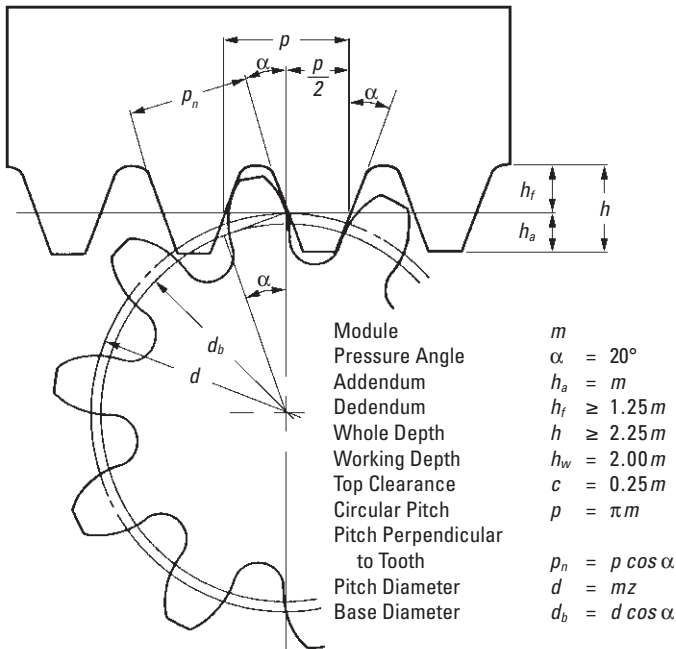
The Tooth Profile and Dimension of Standard Rack
